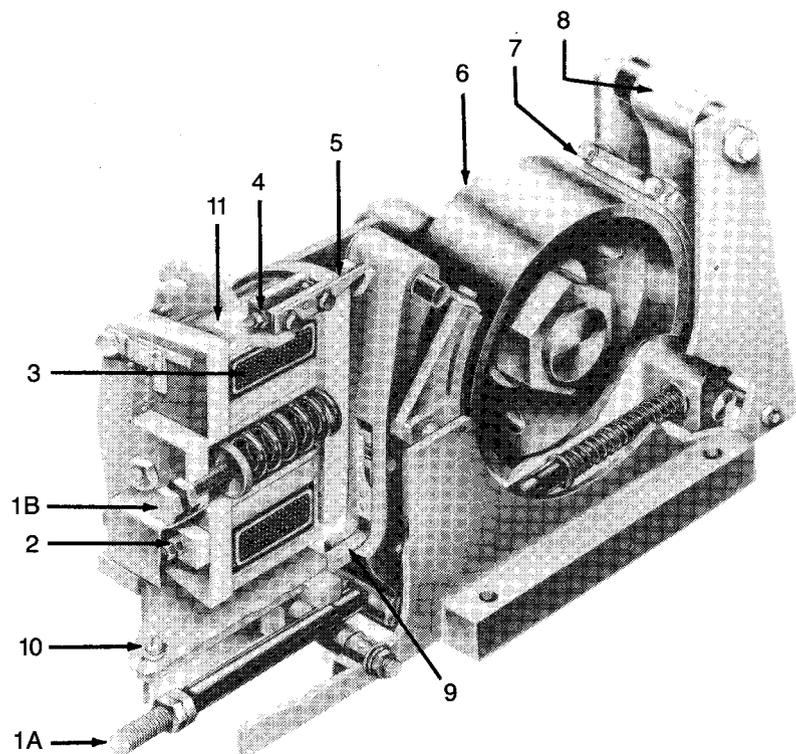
Cutaway view of IC9528 magnetic brakes, wheel sizes 8 inches through 23 inches
